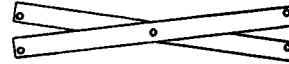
SIZZOR ARMS INSTALLATION - CM1732.
